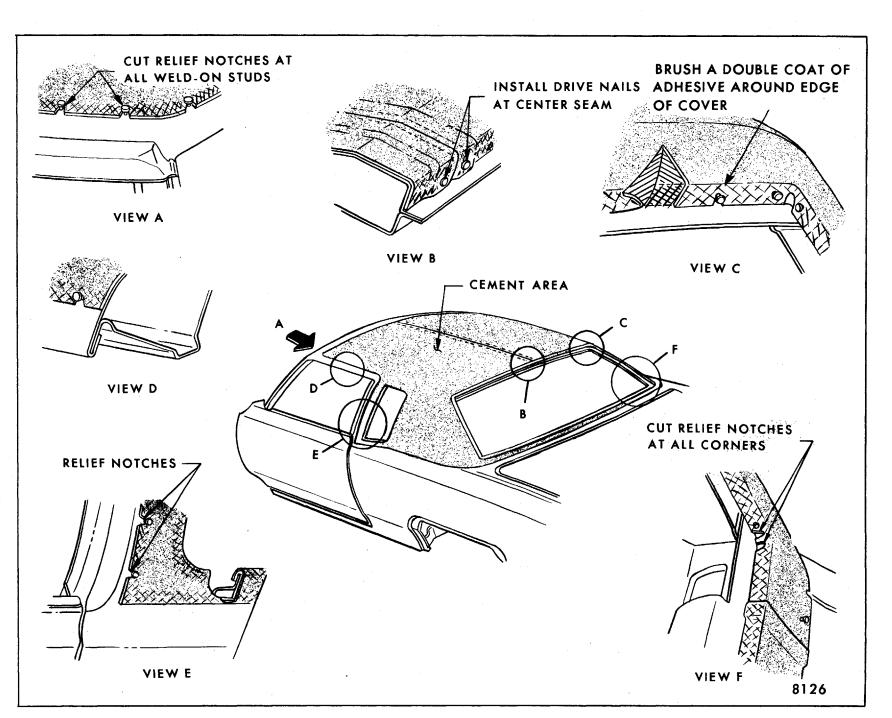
Typical B and C-37 Style C04 Option (Landau)
